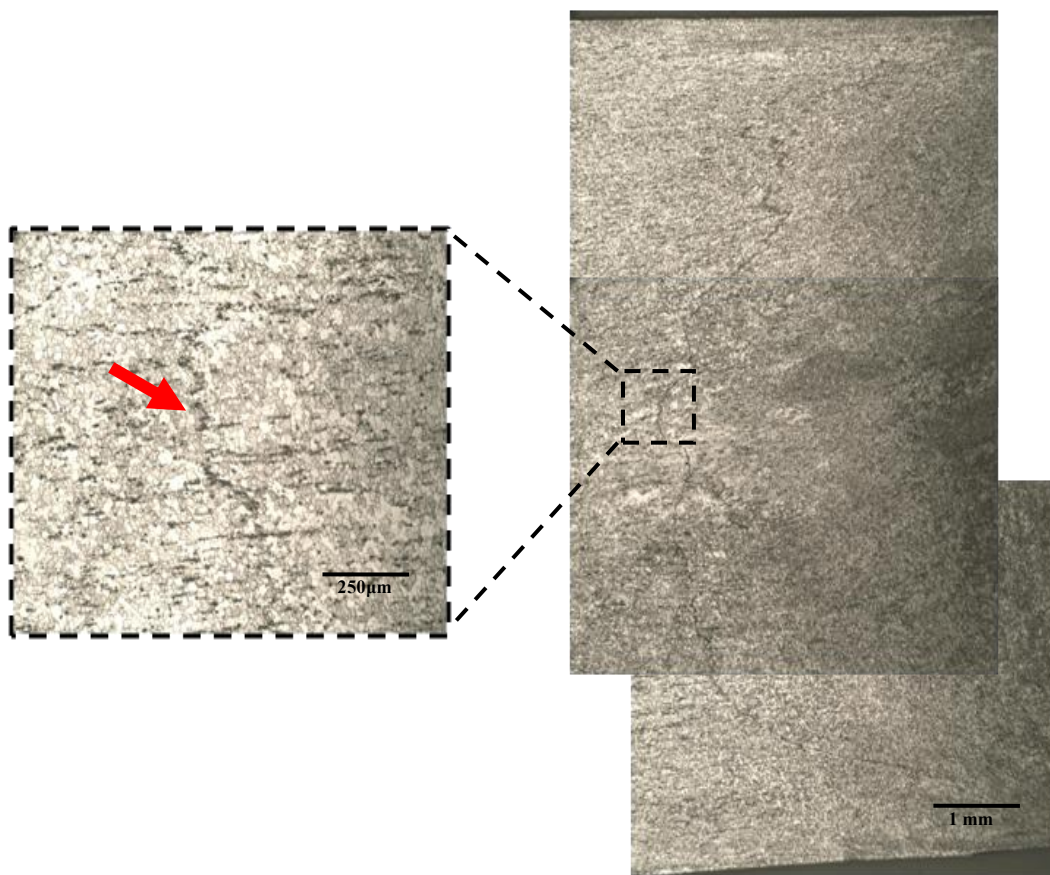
Lazy S defect in the nugget region of a friction stir welded joint. This defect is associated with the lack of bonding due to the oxide layer on the surfaces of the plates to be joined.
